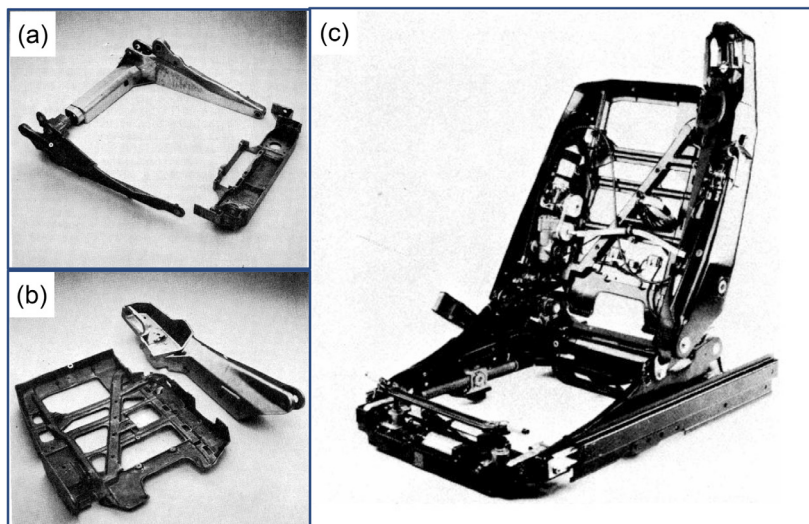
Seat frame consisting of 5 Mg die casting parts: (a) backrest; (b) cushion; (c) assembly [11]
